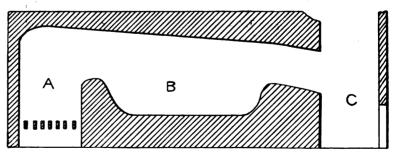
Lengthwise section of a furnace used in making wrought iron or machine steel-
